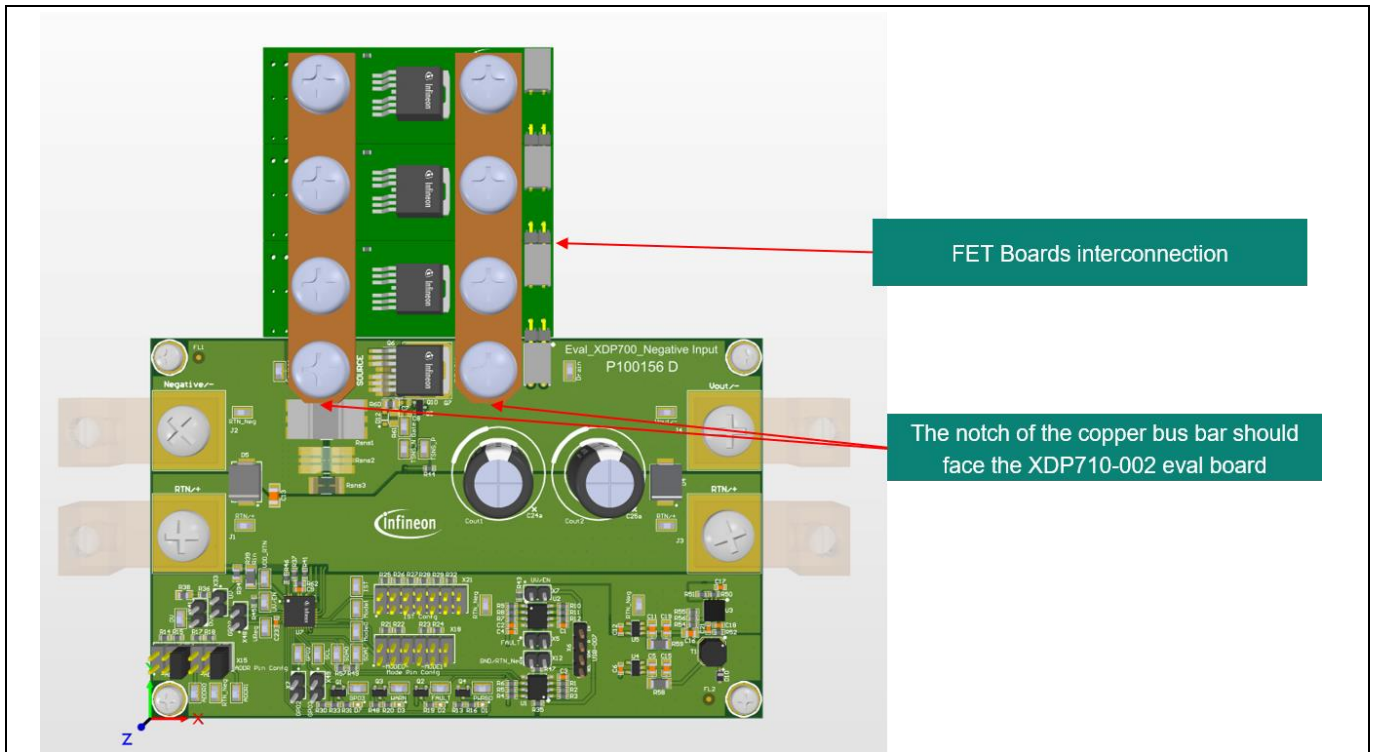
MOSFET adapter board interface with XDP700-002 Evaluation Board
